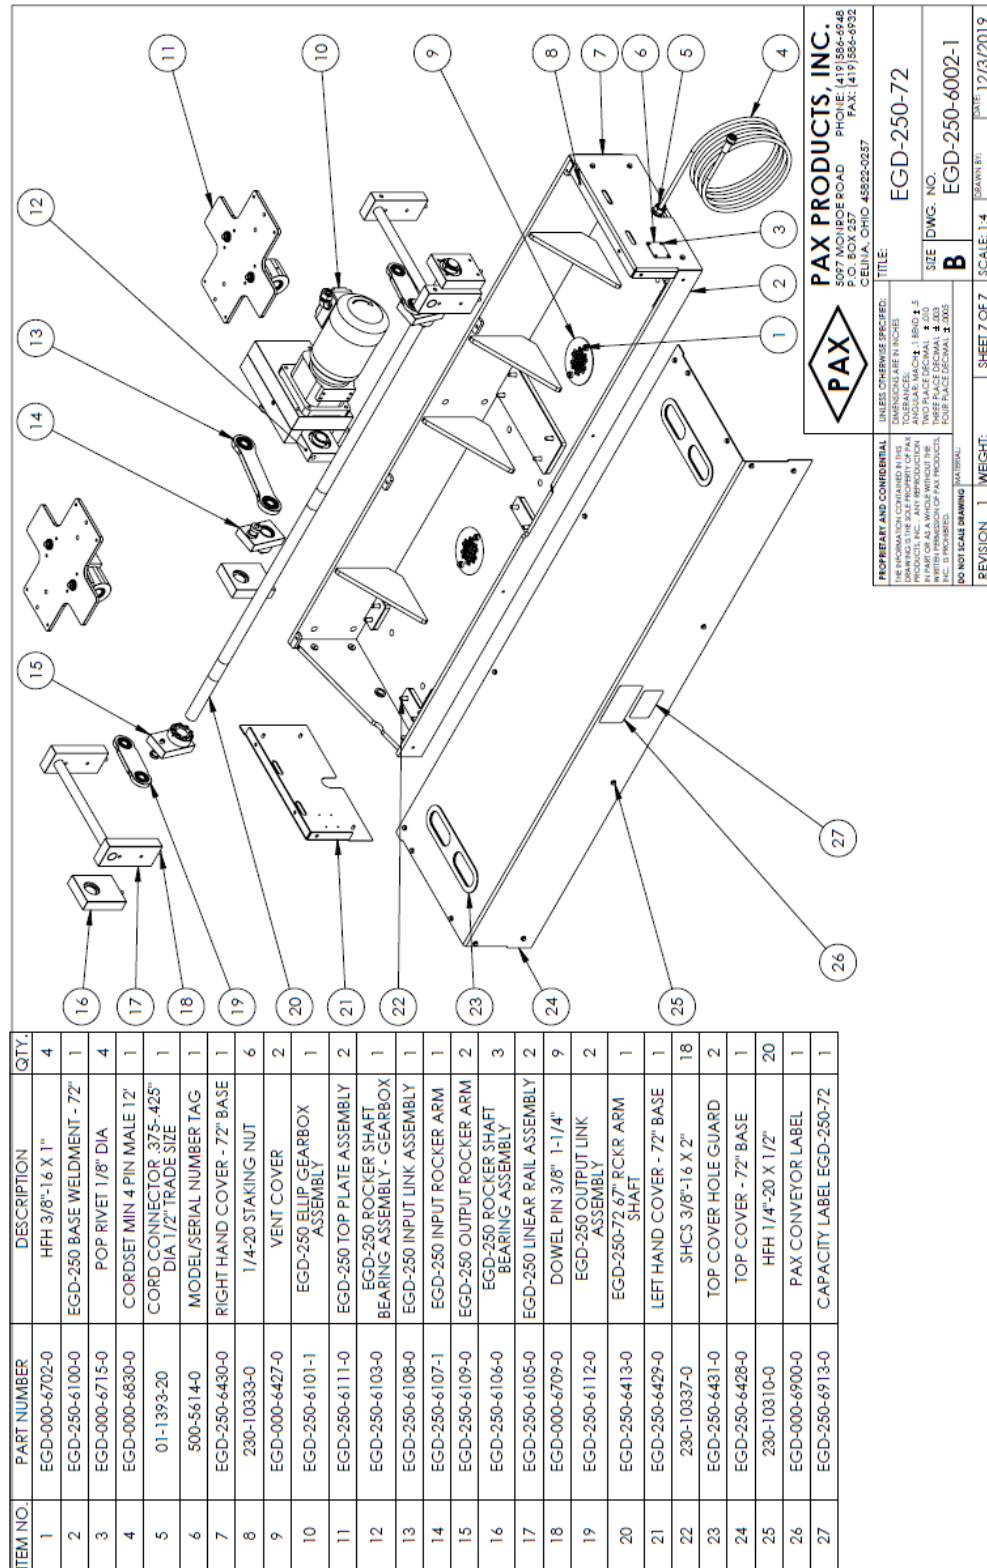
EGD-250-72 DRIVE UNIT ASSEMBLY
